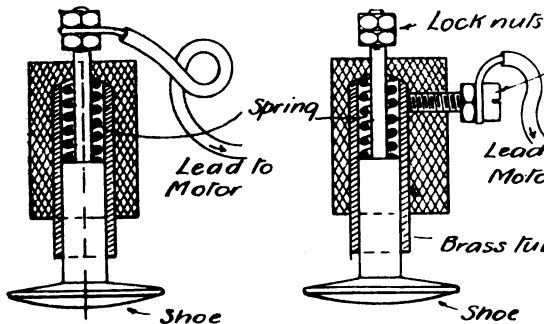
COLLECTOR FIXED IN FIBRE BLOCK WITH CONNECTION TO SPINDLE.
